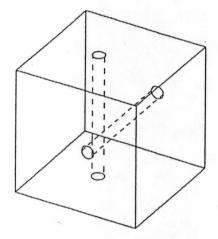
Two Nearly Intersecting Perpendicular Holes.
